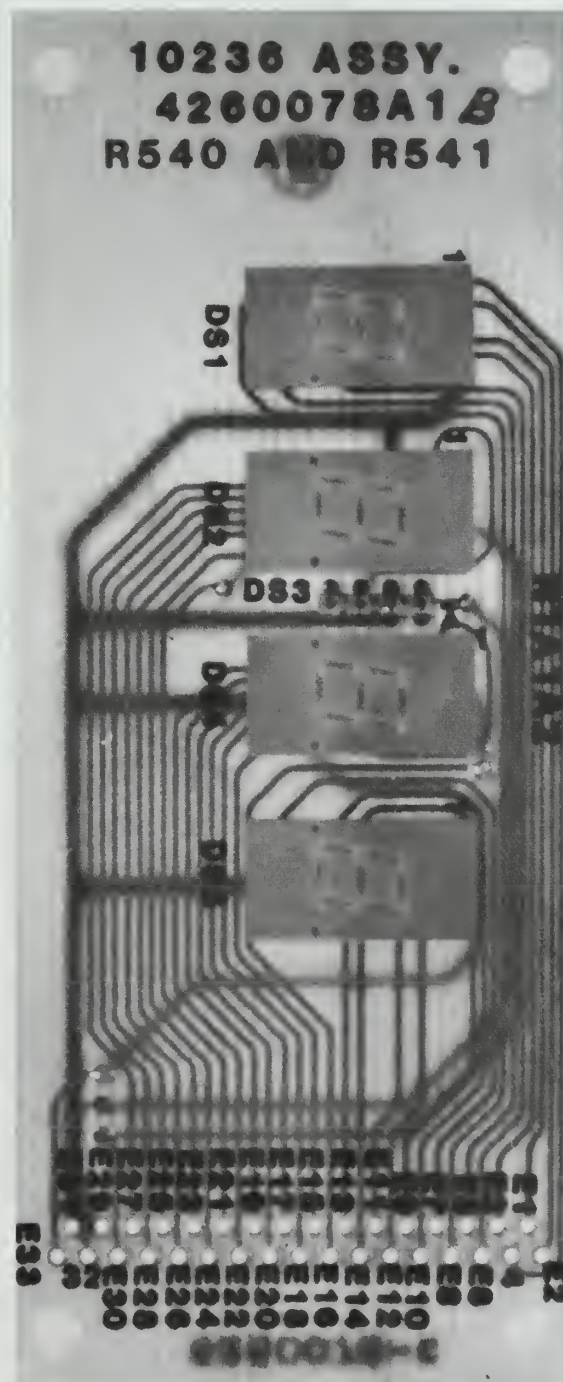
Display Mounting Board No. 2 N1A1A2 — Component and Wiring Side
